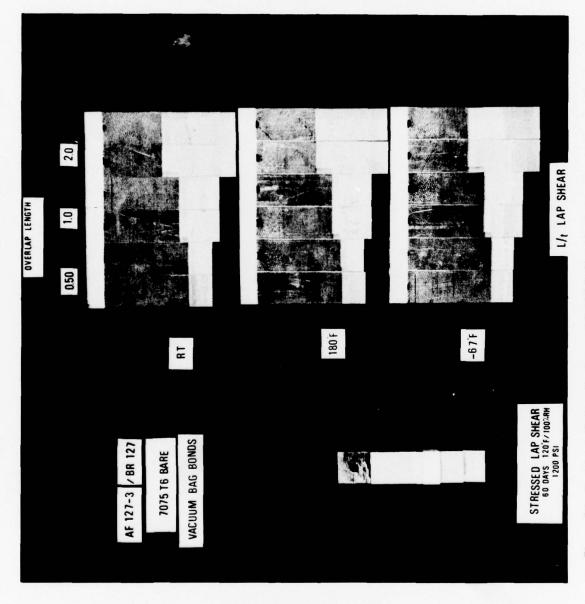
Specimen Failure Surfaces—AF 127-3, Non-Tank Anodized, Vacuum Bag Bonds
